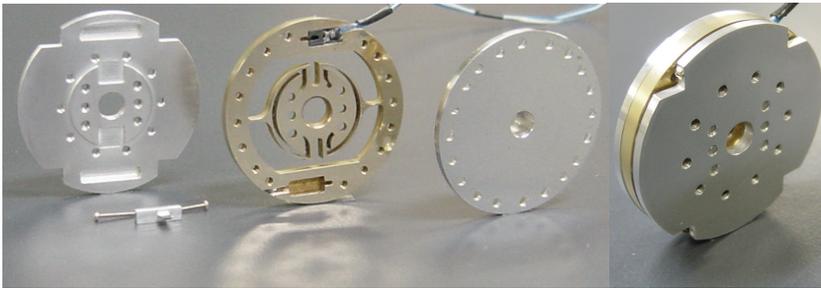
Optical torque sensor with semi-ring-shaped flexure
